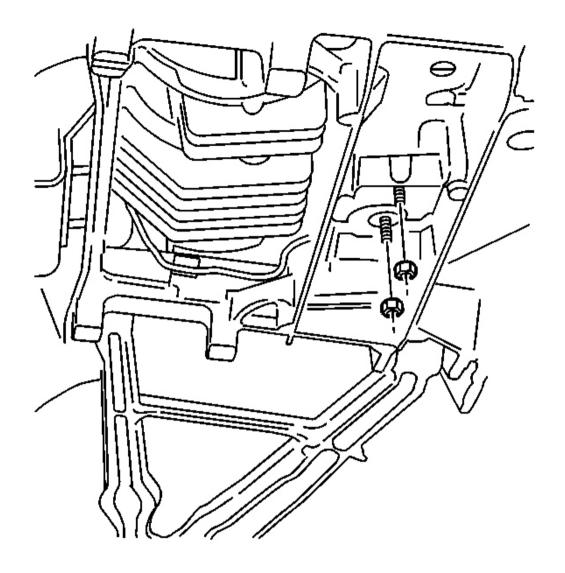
Transaxle Mount To Rear Crossmember Nuts Courtesy of GENERAL MOTORS CORP.
